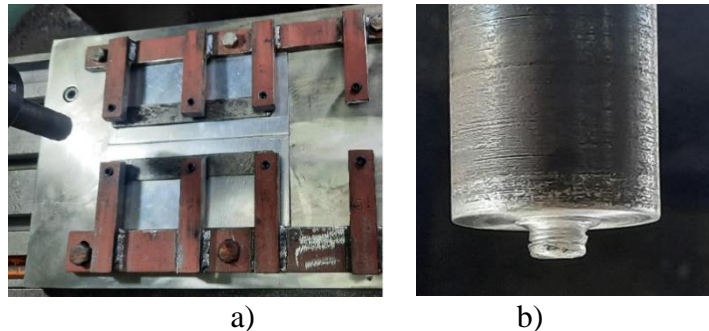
Fixture and tool (Gospodinov D. et al., 2021)
